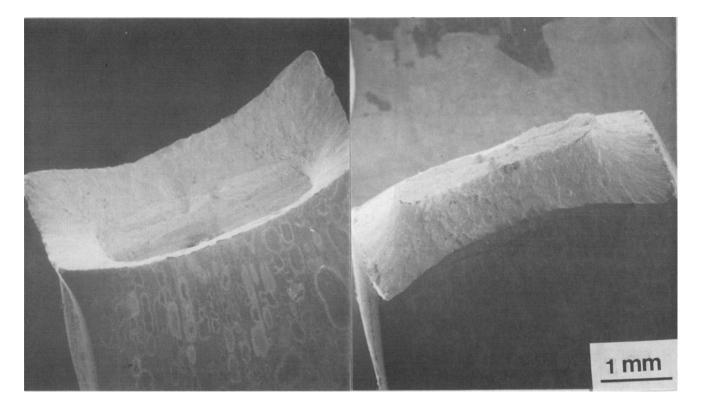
Fracture surfaces of C4340 specimen after erosion-corrosion test with cathodic protection, followed by tensile testing.
